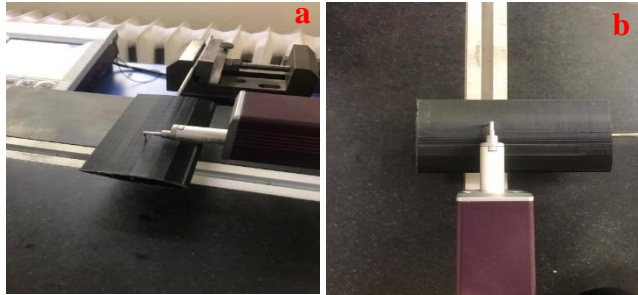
a) Isometric and b) top view of the blades surface during roughness measurements.
